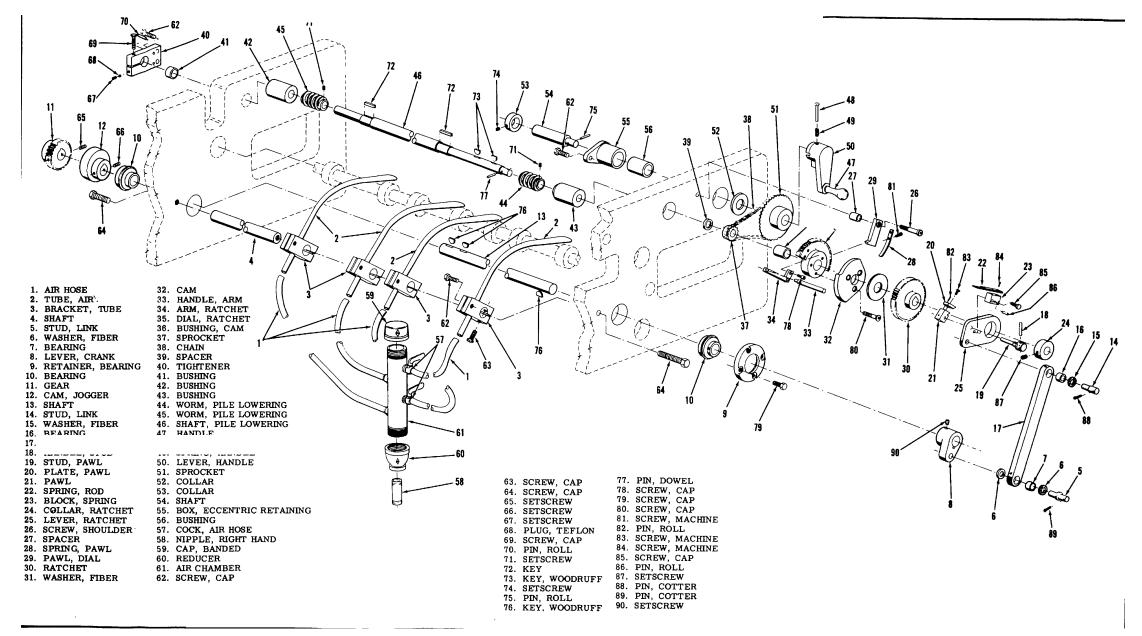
Air tubes and pile lowering mechanism, exploded view.
